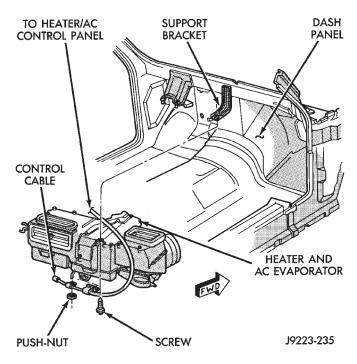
Heater and A/C Evaporator Unit Removal/ Installation
